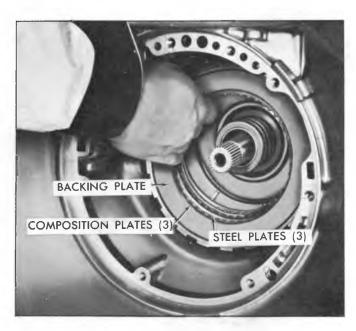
T--Removing Intermediate Backing Plate and Clutch Plates
